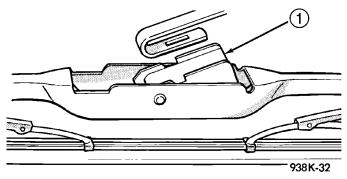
FRONT WIPER BLADE - REMOVE/INSTALL
